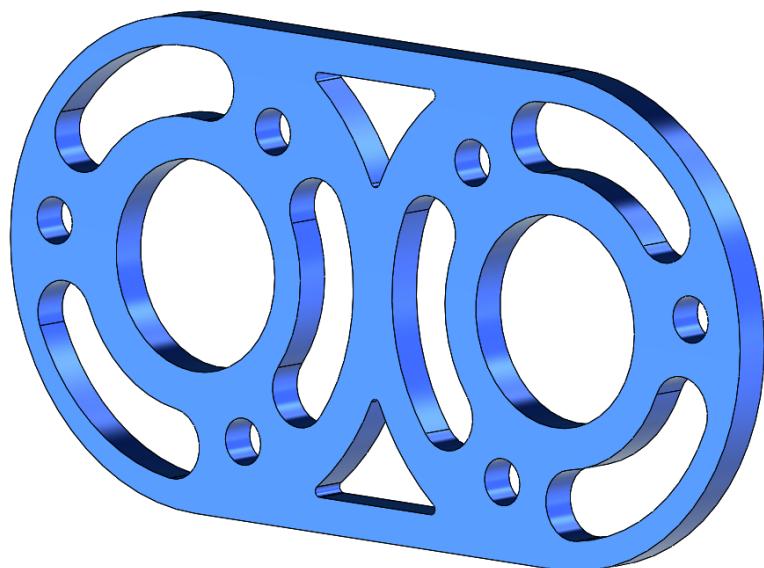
Hirani, Asimm: Gearbox Steel Plate
